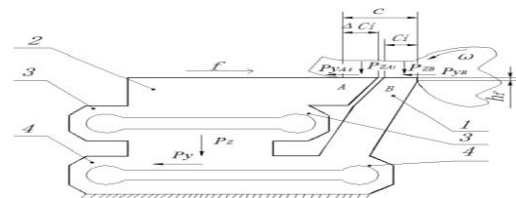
The research of contact loads distribution over a face surface of the cutting tool by the method of the “split cutter” on a lathe with horizontal feed rate f
